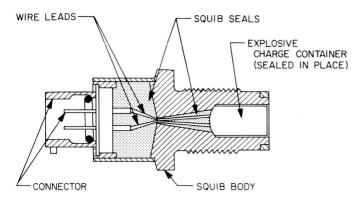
Dual-bridgewire squib assembly, cutaway view
